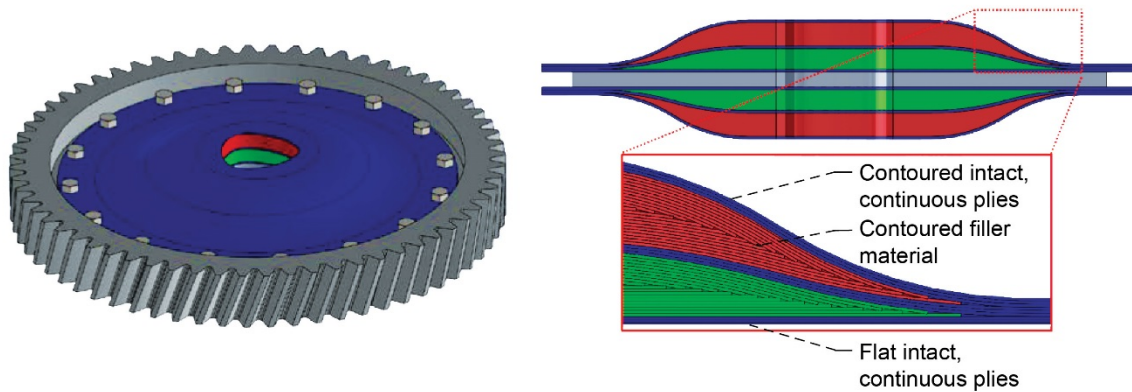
Planar composite gear concept. (a) Model. (b) Sectioned view showing inner layout of composite plies.
